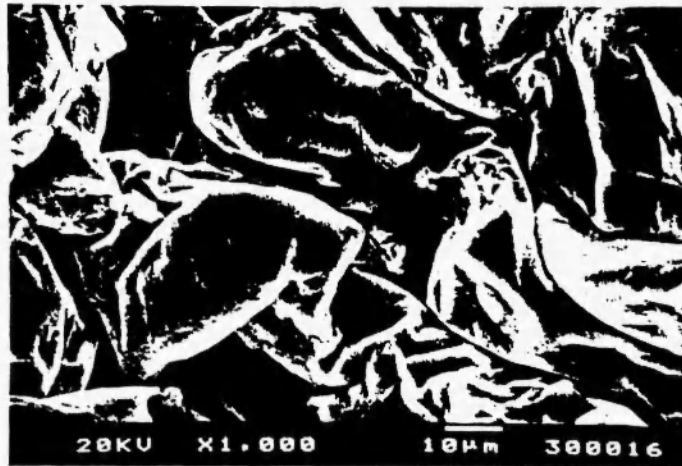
SEM observation of a folded oxide film observed on a fracture surface.
